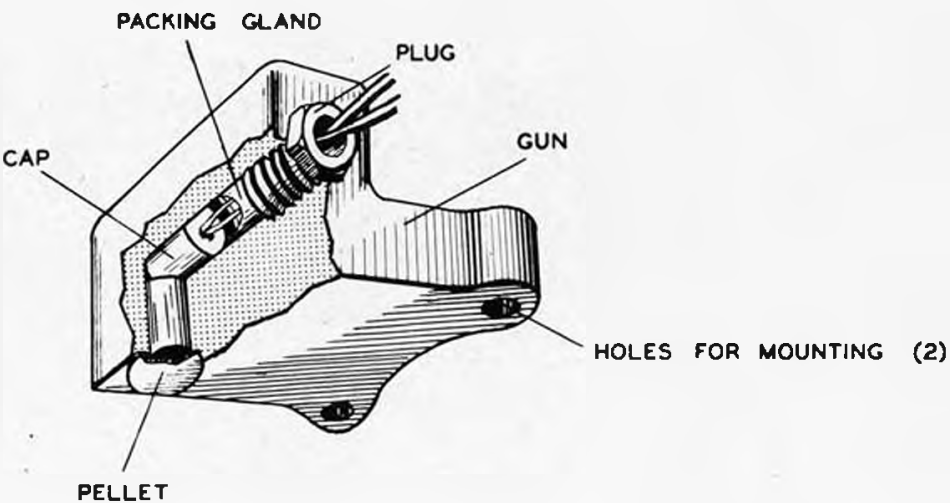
Mk 10-3 Exploder Cap Gun, Cutaway View
